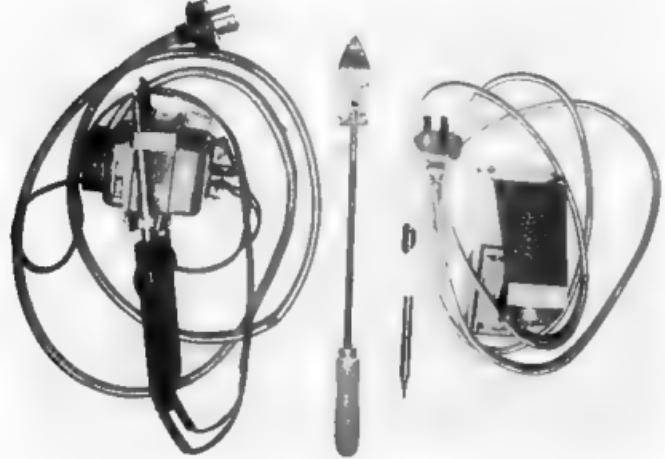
Soldering irons for transistors, leaky guttering and valve wiring.
